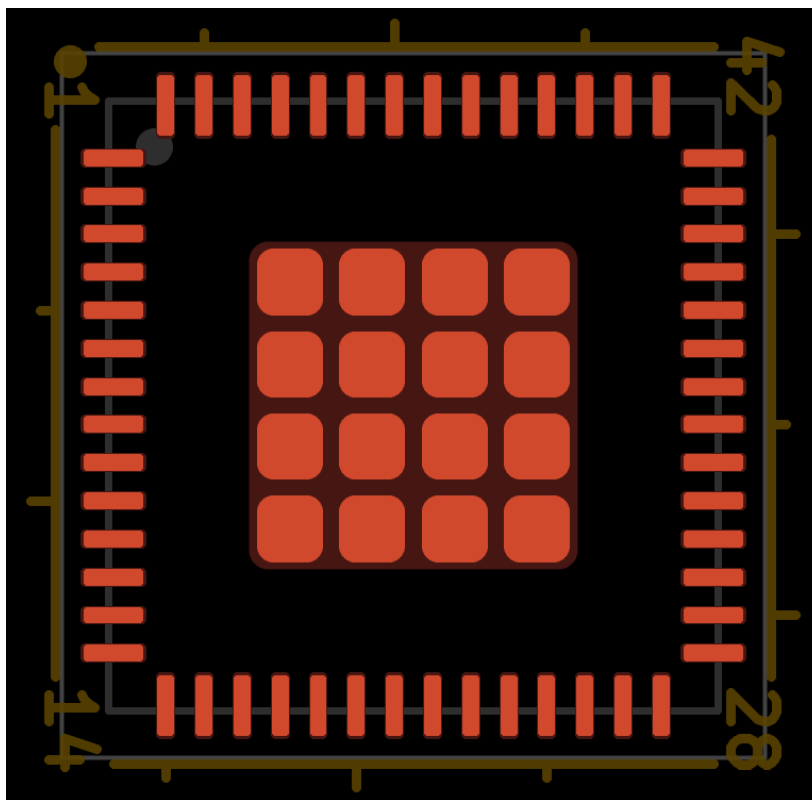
QFP footprint with visible solder paste apertures on the heatsink pad.
